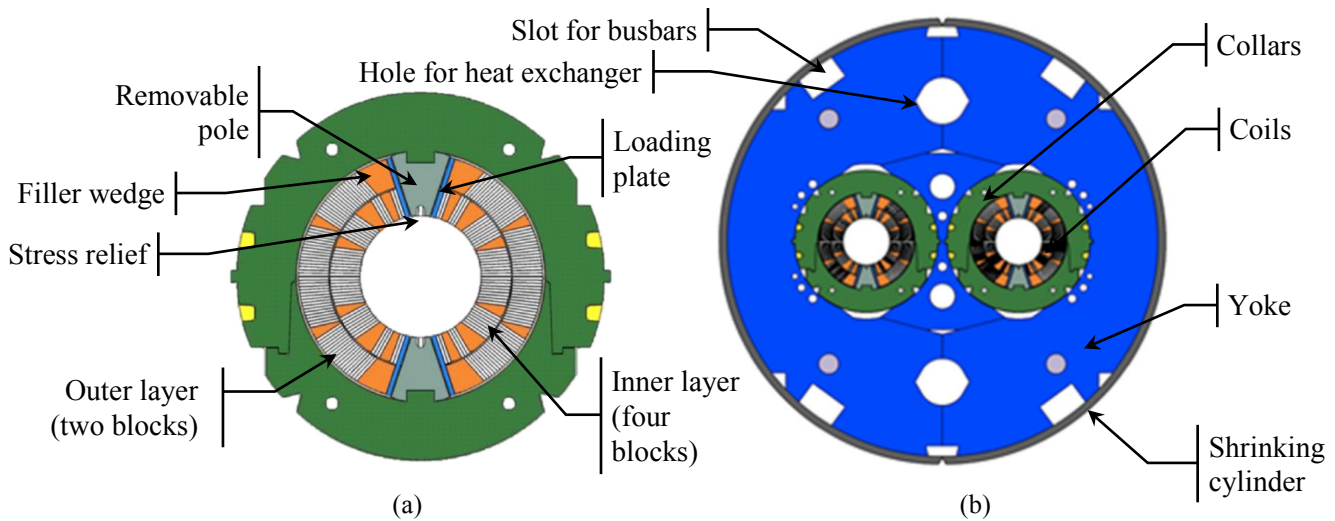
Cross-section through (a) the 11 T dipole collared coil; (b) cold mass assembly
